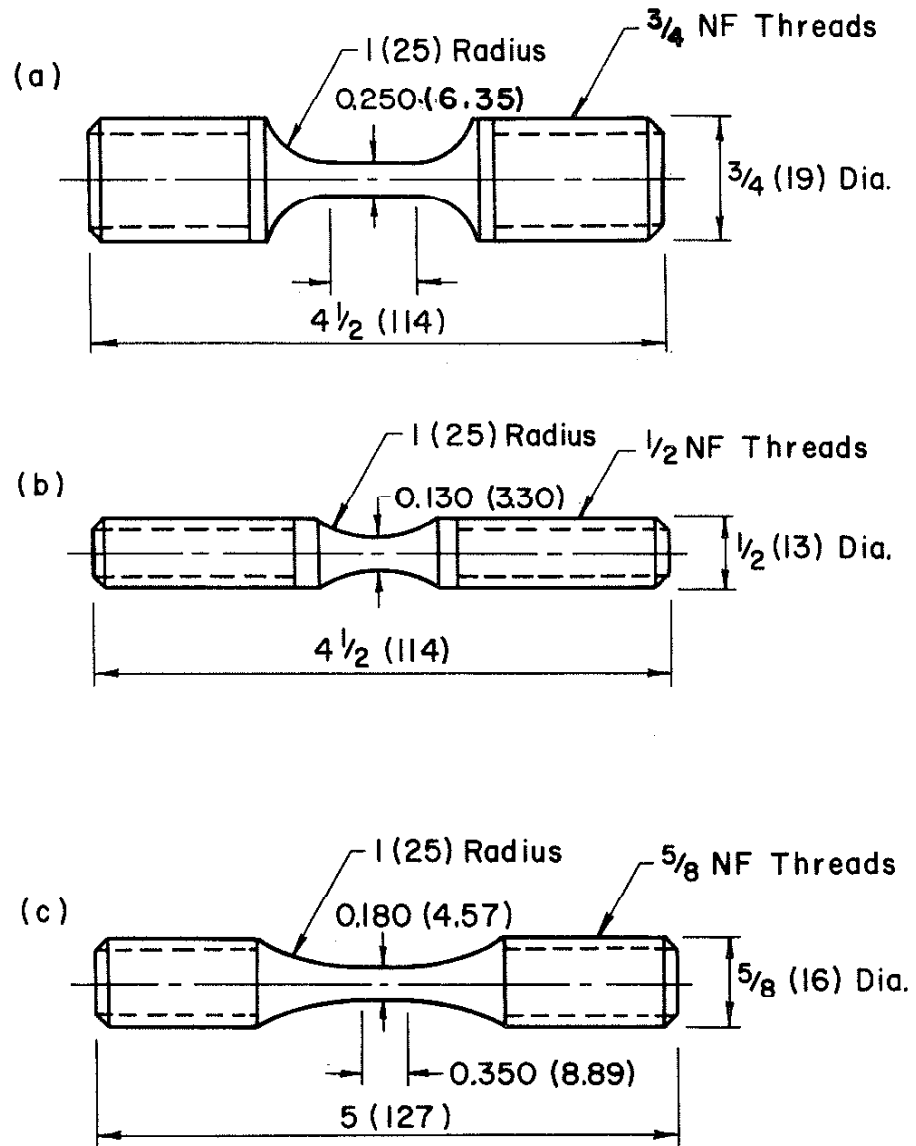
SMOOTH SPECIMENS OF (a) 5083-0 ALUMINUM BASE METAL, (b) 5183 ALUMINUM WELD METAL AND (c) A36 SIMULATED WELD HAZ. (ALL DIMENSIONS ARE IN INCHES (mm)).
